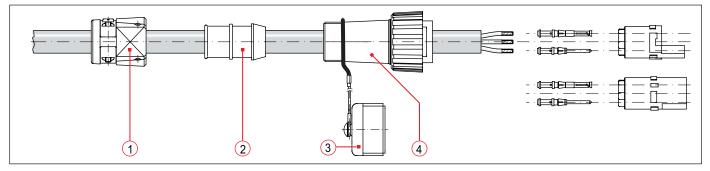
Example for plug with back shell, strain relief and cable gland (applies also for cable receptacles)
